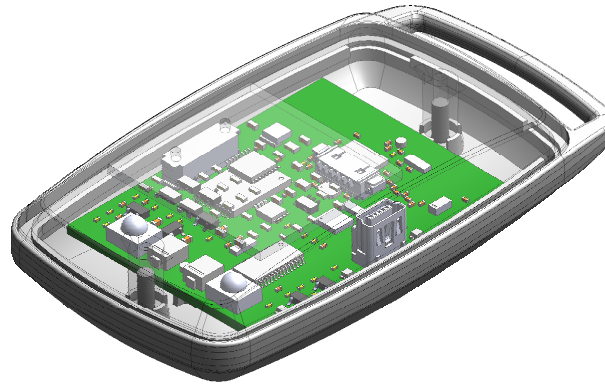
3D drawing of the generic board with sensor specific board (SpO₂)
